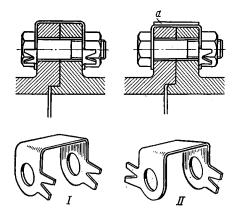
Twin tab washers for nuts and bolts in flange assemblies
